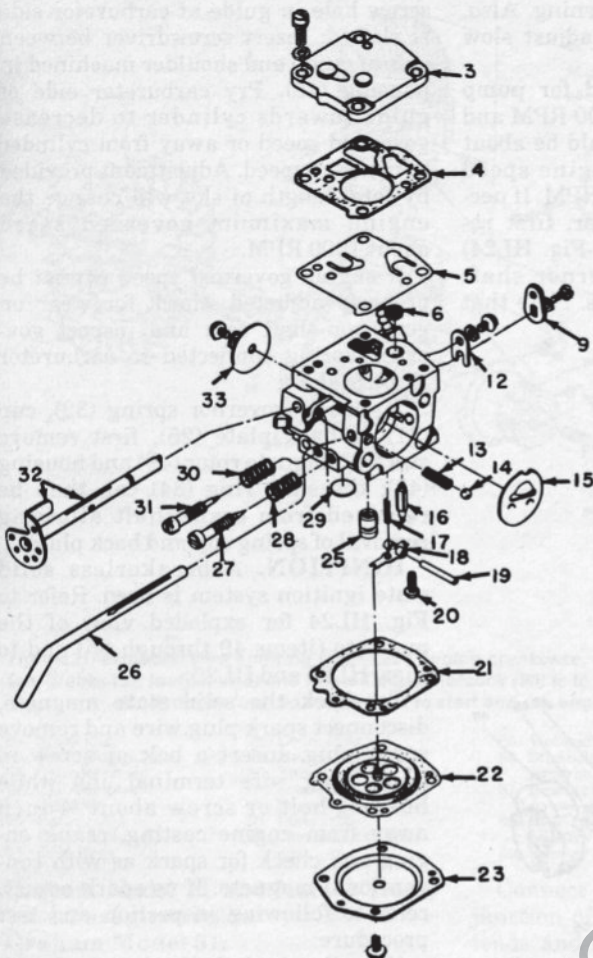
Exploded view of Tillotson Series HS carburetor used on model 251 engine. Note that carburetor is shown inverted from actual position on engine.
